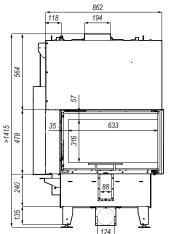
Projections with dimensions of DEFRO HOME RIVA ME G fireplace insert.
